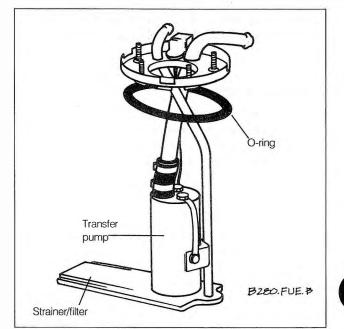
Transfer pump and fuel gauge sending unit being removed from fuel tank. Use two screwdrivers to engage lugs on housing.
